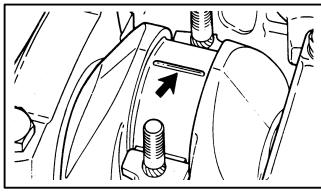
PLASTIGAGE® ON A BEARING JOURNAL
